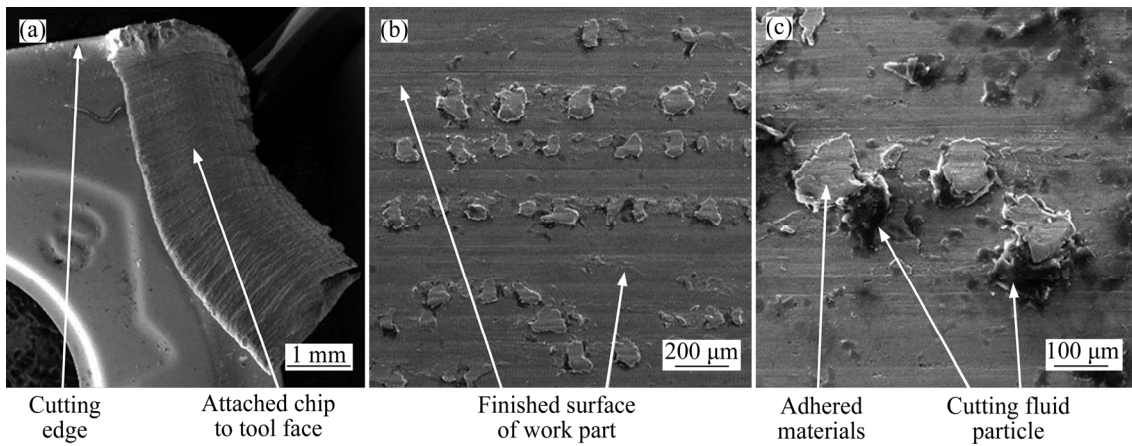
SEM images of tool rake face and work part surface for MQL based conventional cutting fluid: (a) Tool rake face; (b) Adhered materials; (c) Enlarged image
